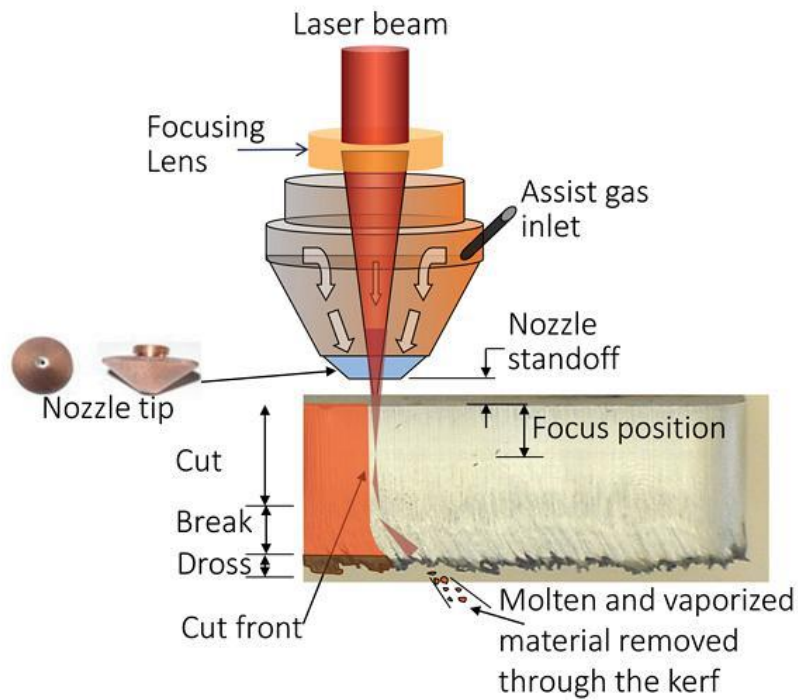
Using CO<sub>2</sub> in Laser beam welding.
